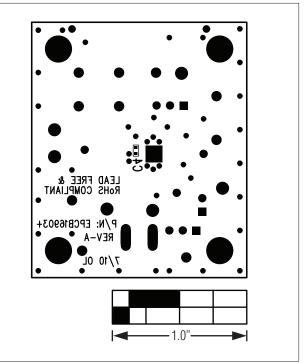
MAX16903 EV Kit Component Placement Guide— Solder Side
